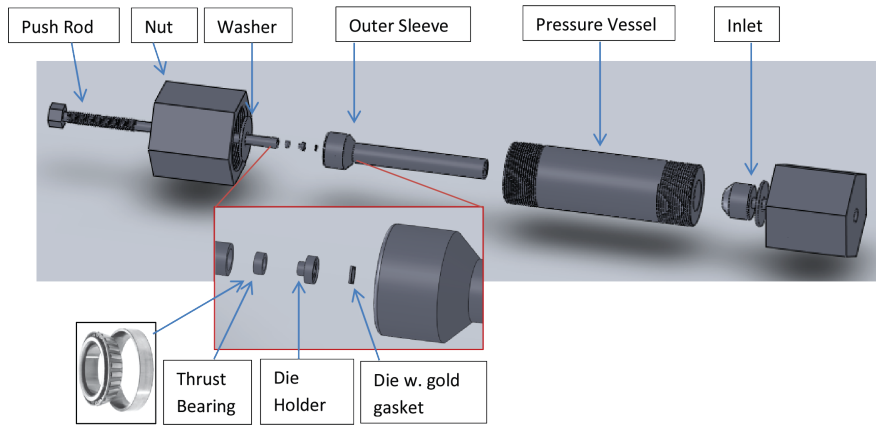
Water in larger volume area allows for assembly of electrical connection for testing pre-full vessel assembly. Need to add feedthrough to push rod in image, but basic design in shown.
